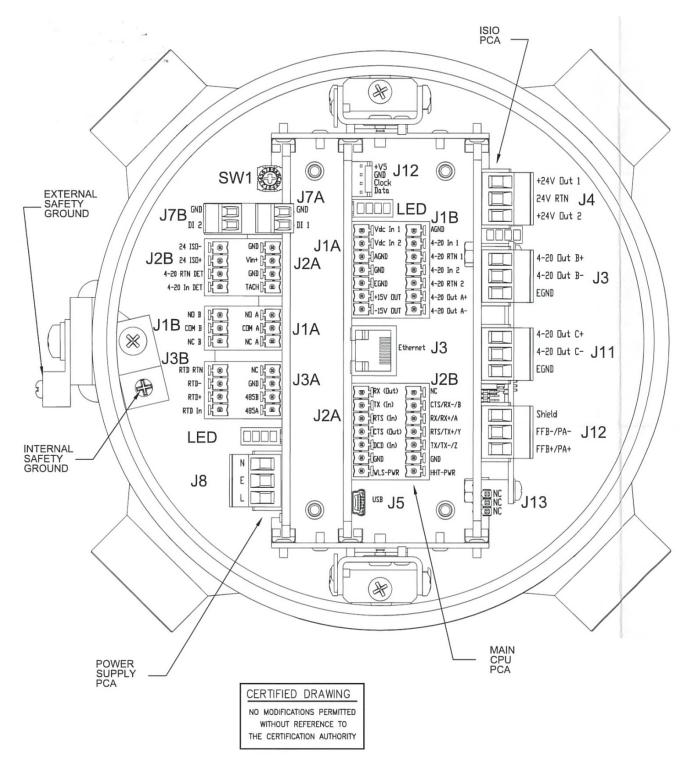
1-0700-038: Installation Wiring Guide, MS2011I (Sheet 1 of 4)
